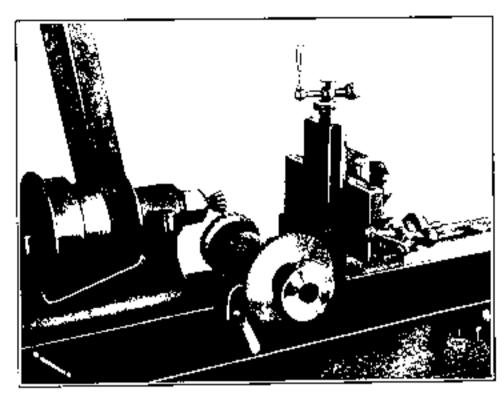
Head end view of Milling Attachment set to mill teeth in a Milling Cutter
